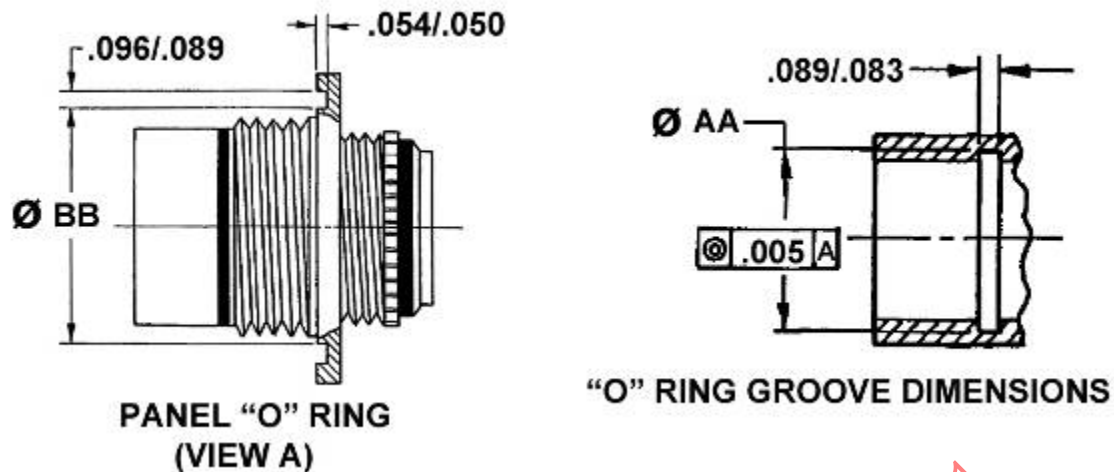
A - FIGURE 15 DIMENSIONS (VIEW A AND "O" RING DIMENSIONS)
